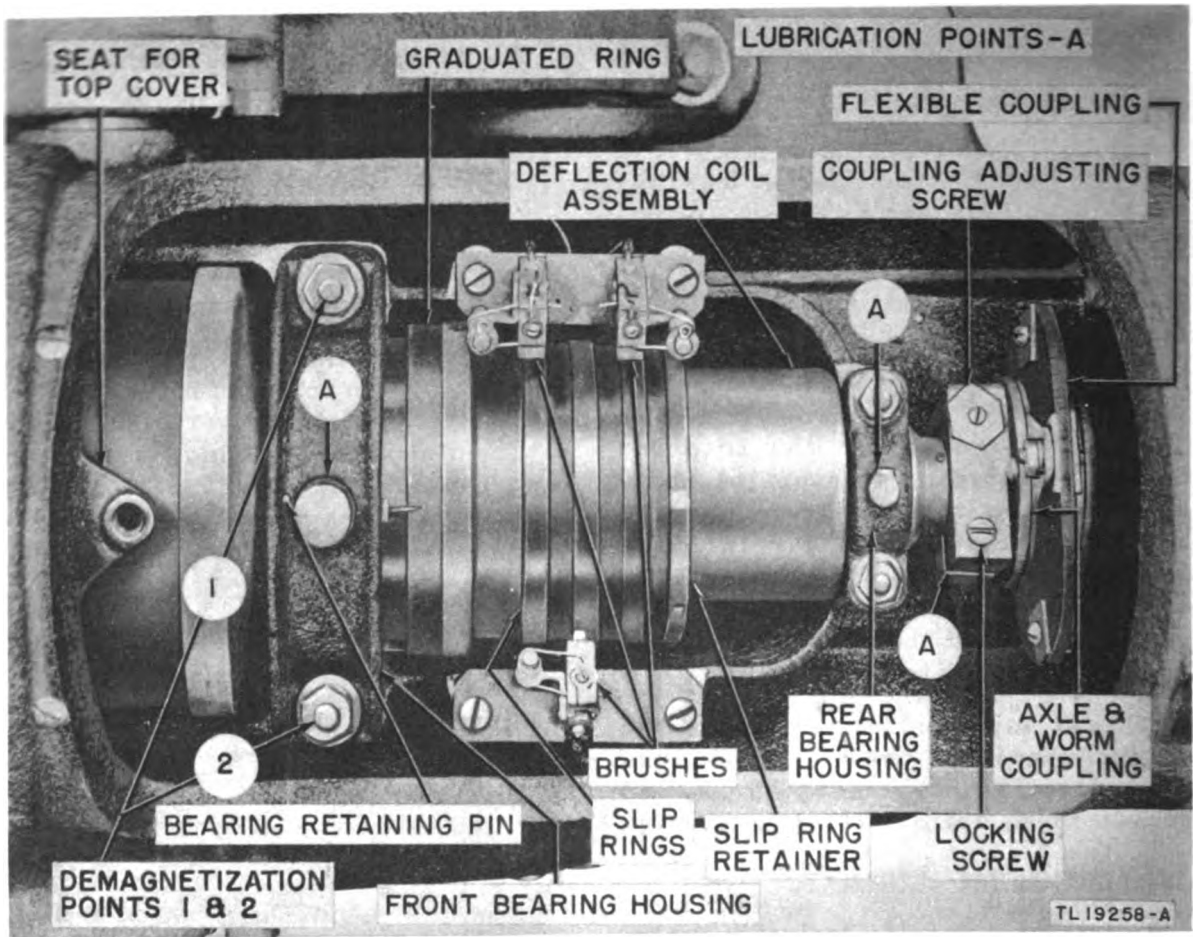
Bearing Indicator ID-121/CRD-3, top view.
